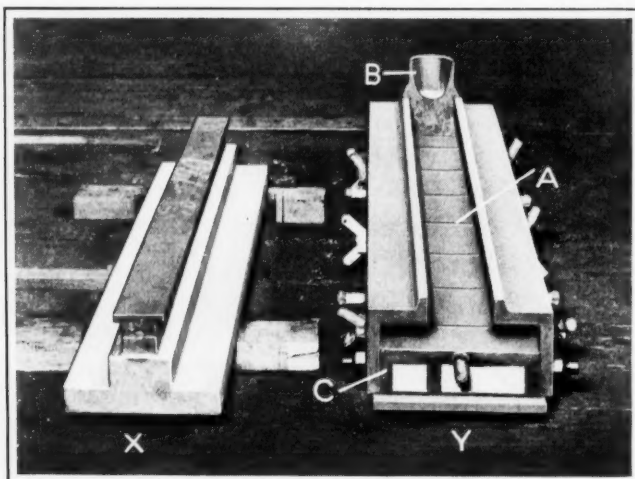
T-shaped Locomotive Cross-head Guide, and Jig which Gives Smooth Babbitted Surfaces within Desired Dimensional Limits
